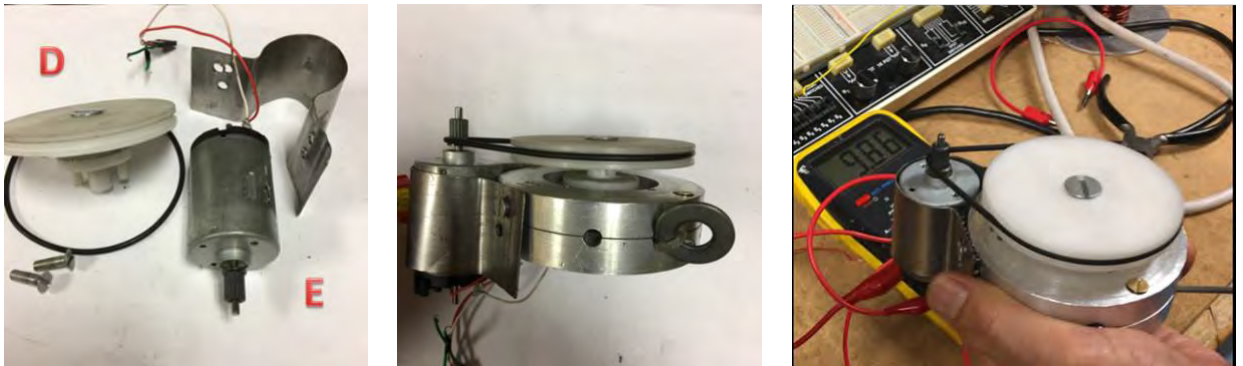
Parts and assembly of the belt band system. (a) Individual components: D. Gear & connection piece E. Generator. (b) Pulley spring and belt band system put together. (c) Device generating electricity
